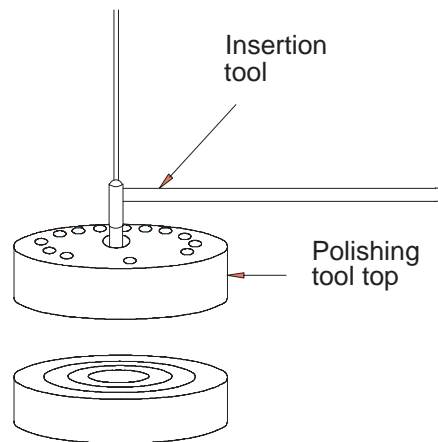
Inserting the Terminus in the Polishing Tool
